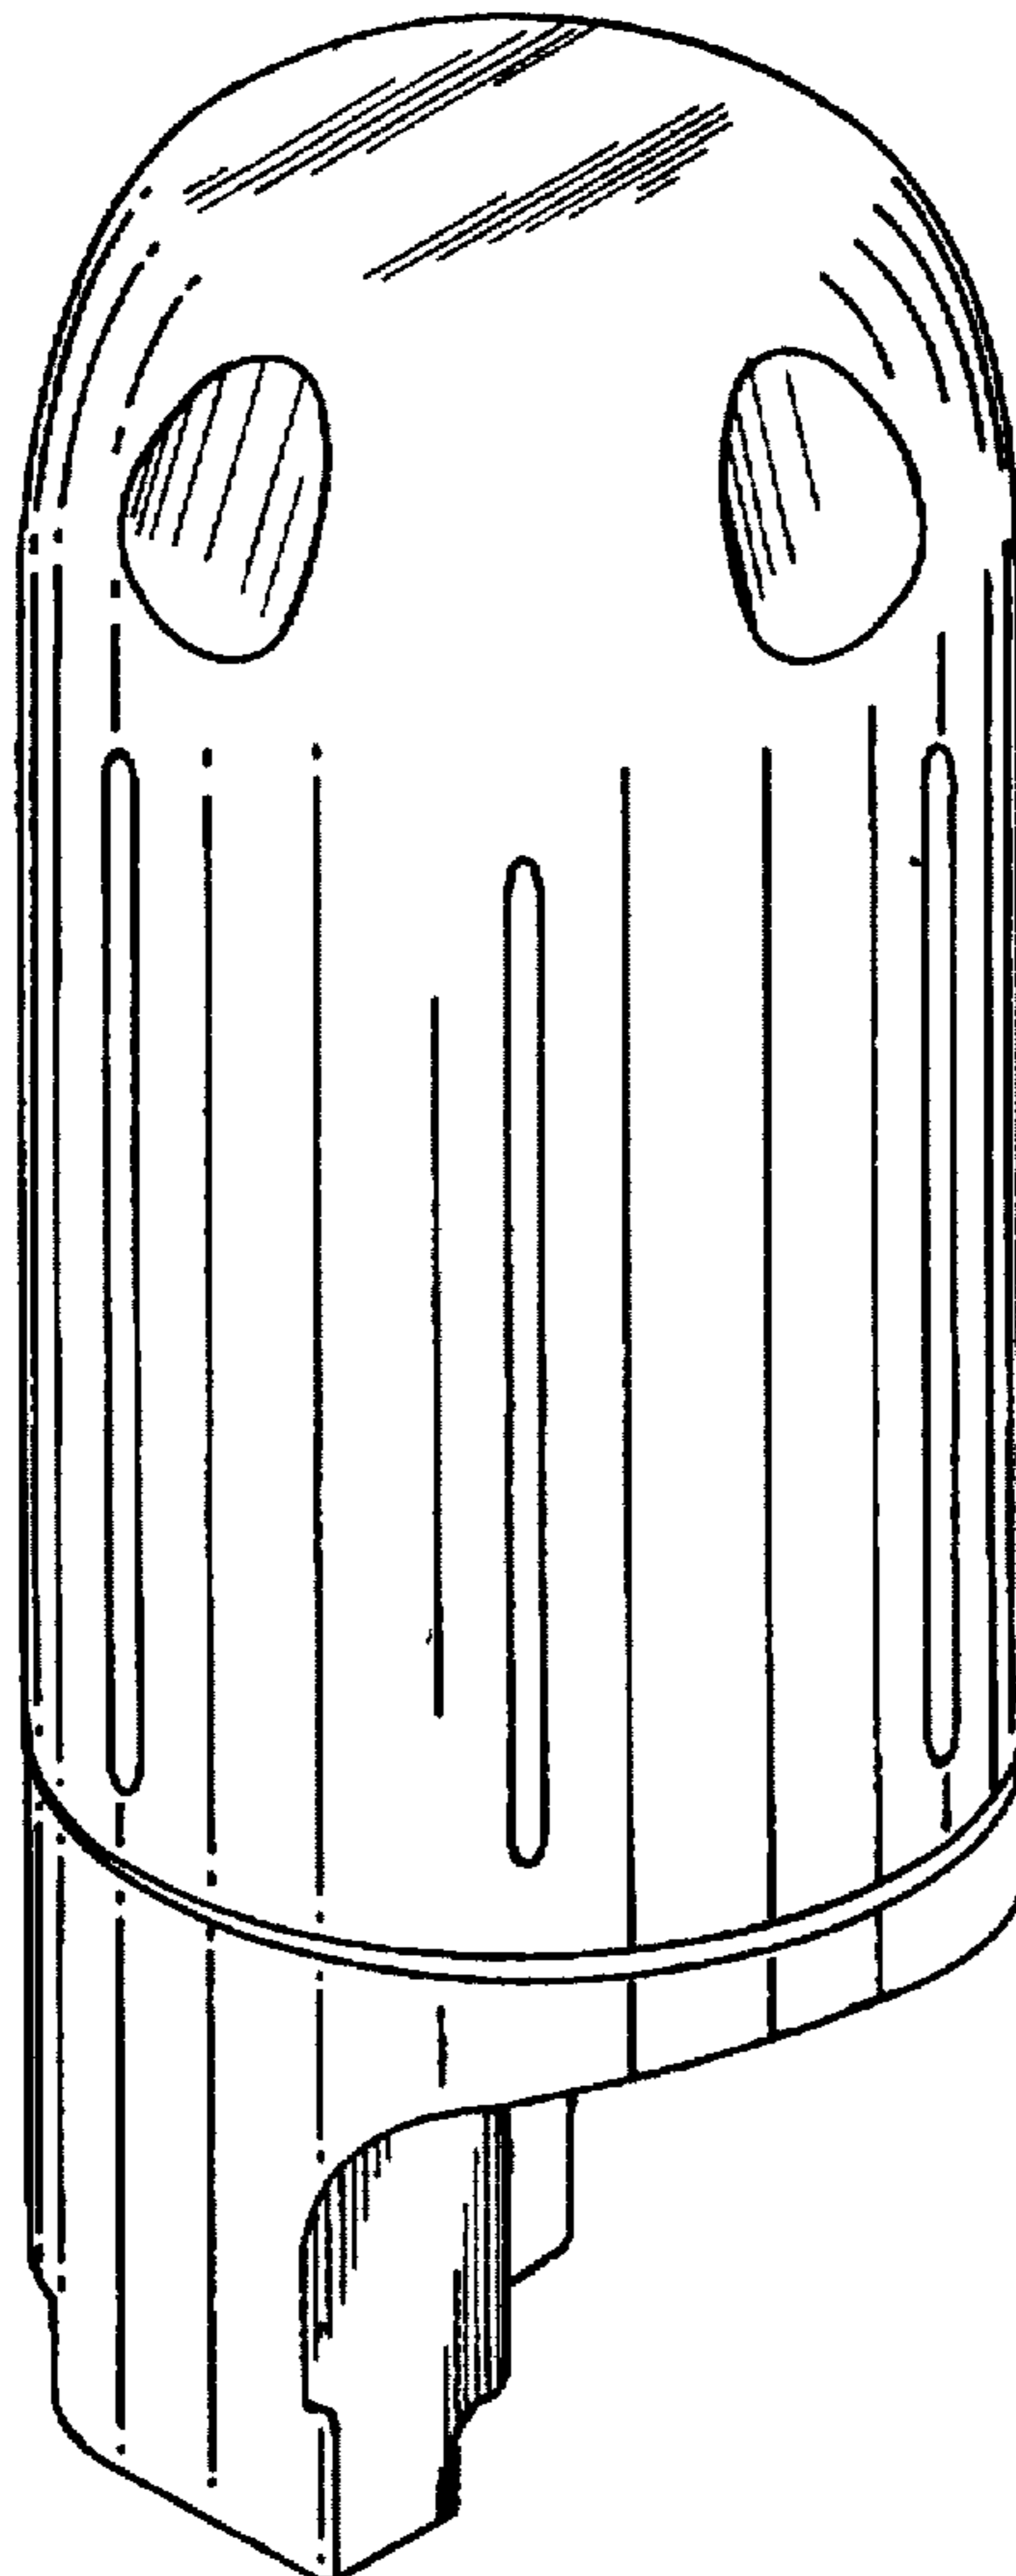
is a perspective view of a canister for inline feeder, showing my design;
